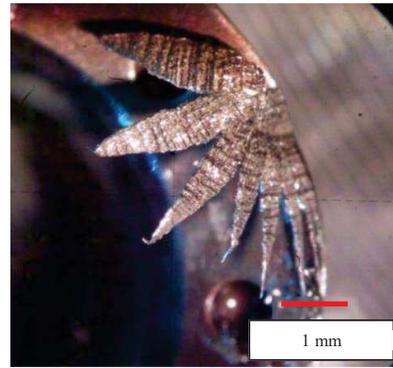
Incomplete segmented anise-like chips appearing during machining, indicating the end of tool life.
